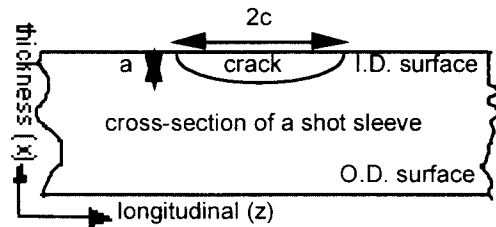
Geometry of a surface crack imbedded in a shot sleeve wall
